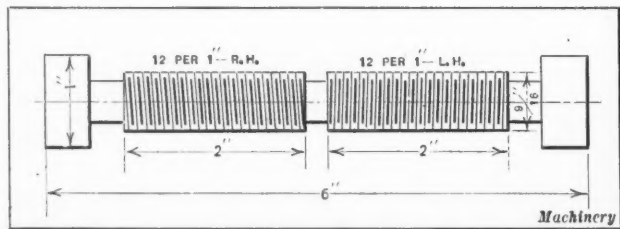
Piece turned and threaded to check Accuracy of Lathe
